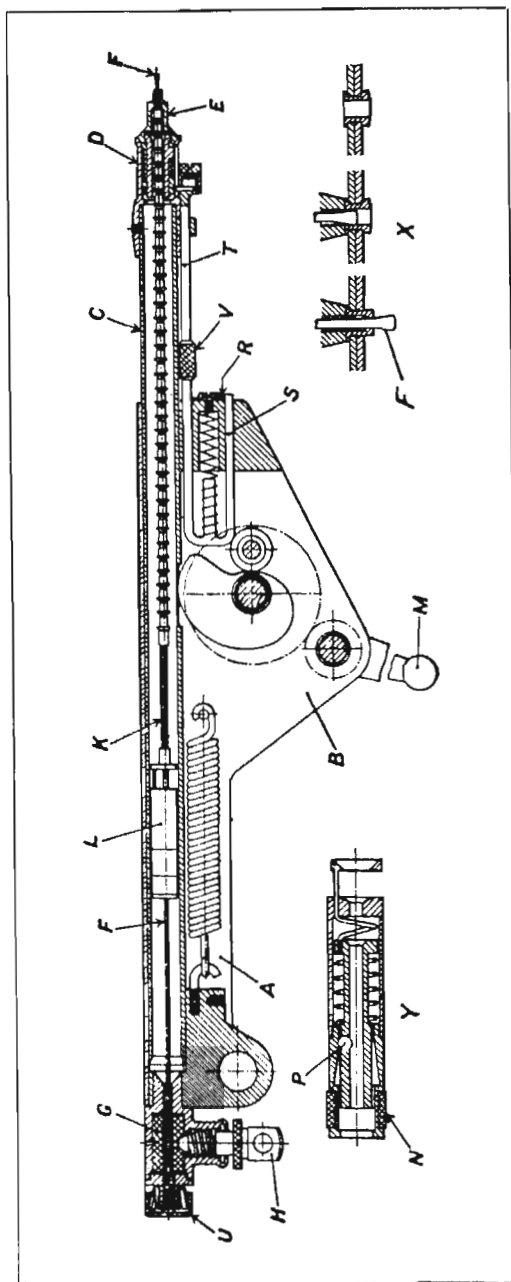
Cross-Section of Chobert Riveting Machine Showing Essential Features of Operating Mechanism.
